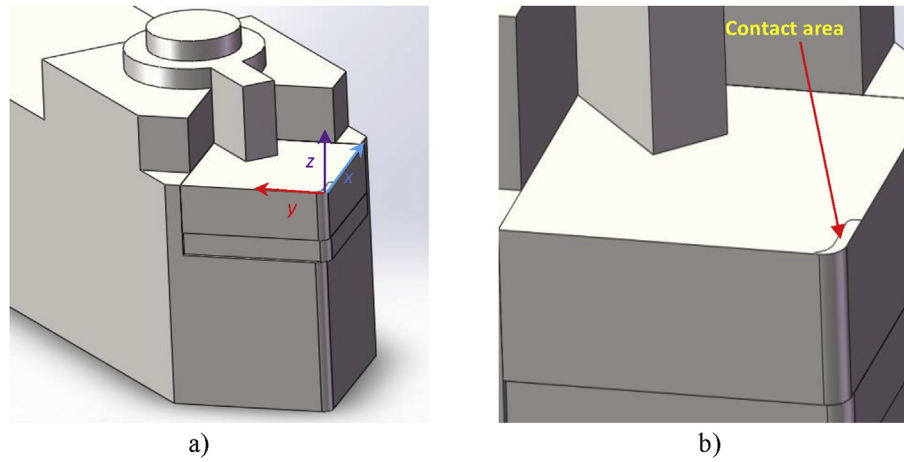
a) Thermal problem scheme and b) detail of the contact interface between the tool and the workpiece.
